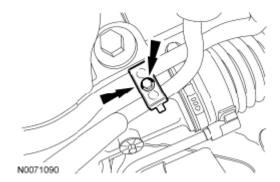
Locating Power Steering Tube Clip And Bolt Courtesy of FORD MOTOR CO.
